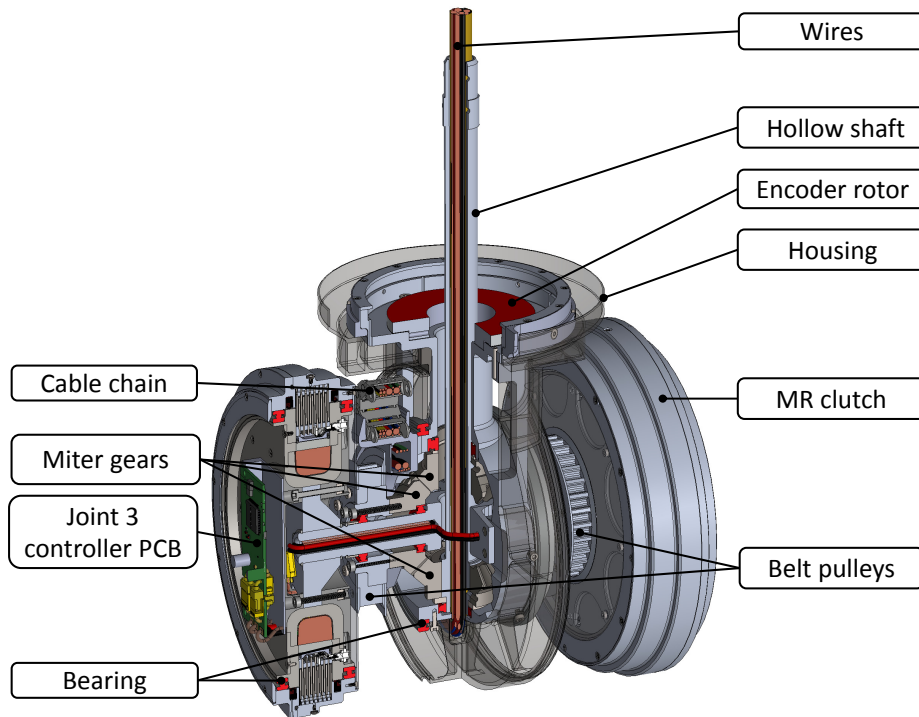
CAD model of the 3rd link of the manipulator (zonal section view).
